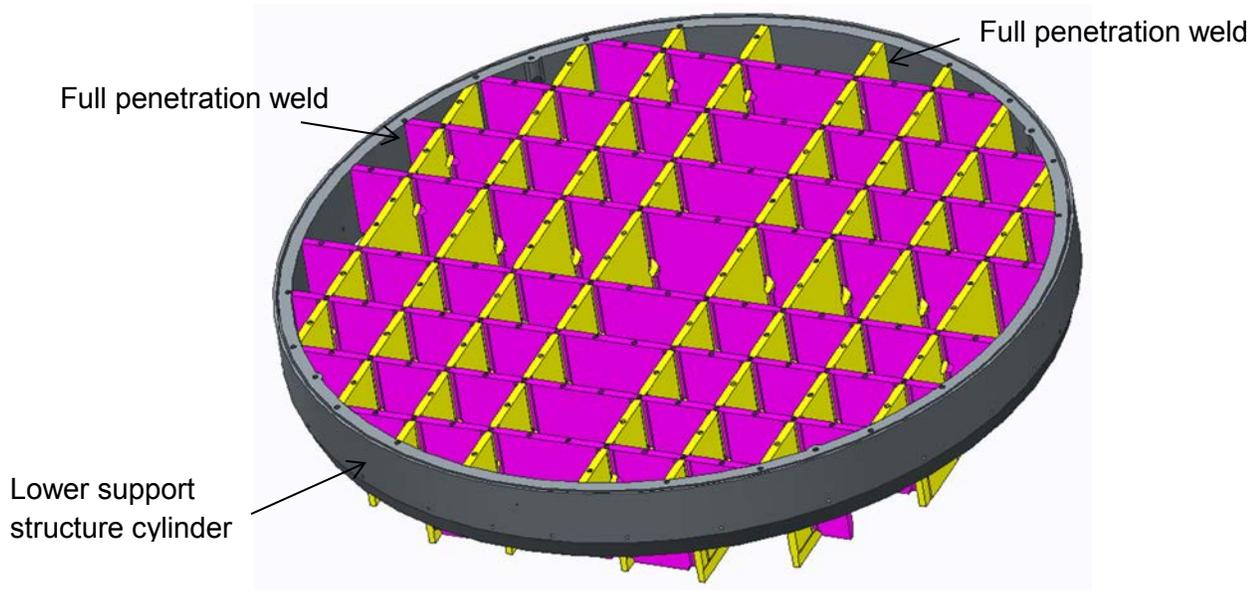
Main support beam and secondary support beam to cylinder weld
